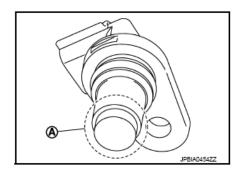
Identifying Magnetic Material Free Surface Of Camshaft Position Sensor Courtesy of NISSAN MOTOR CO., U.S.A.
